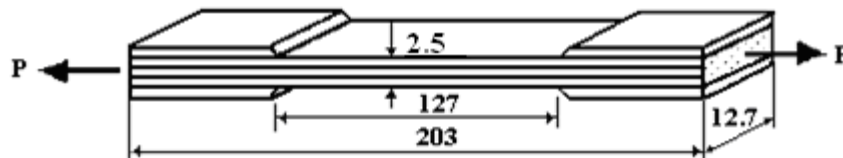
The dimensions and geometry of longitudinal tensile test specimen
